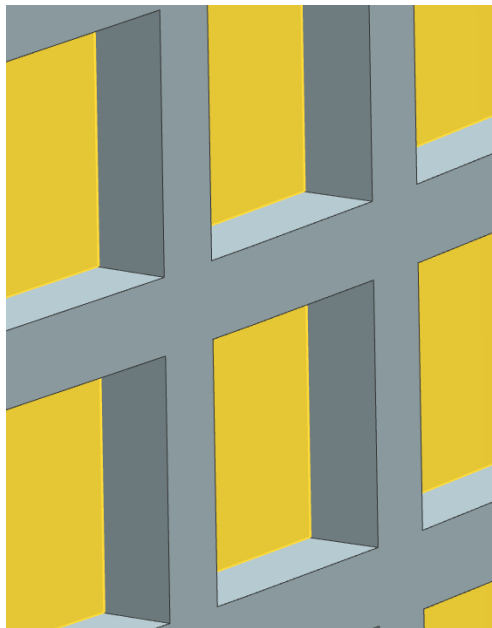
Rib And Stringer Orthogonal Connection Close-Up View
